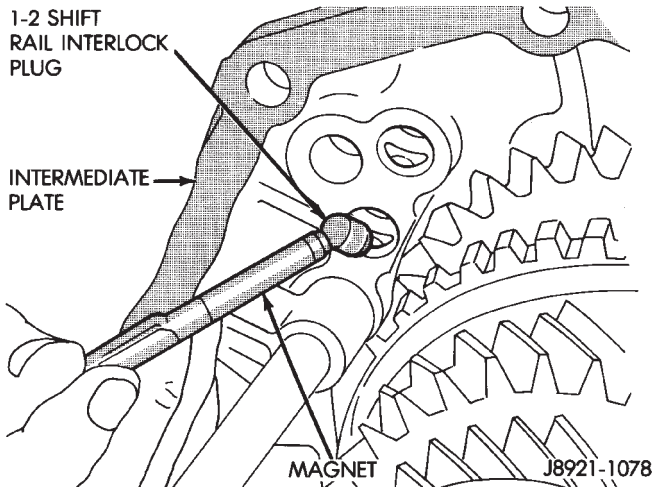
Installing 1-2 Shift Rail Interlock Plug
